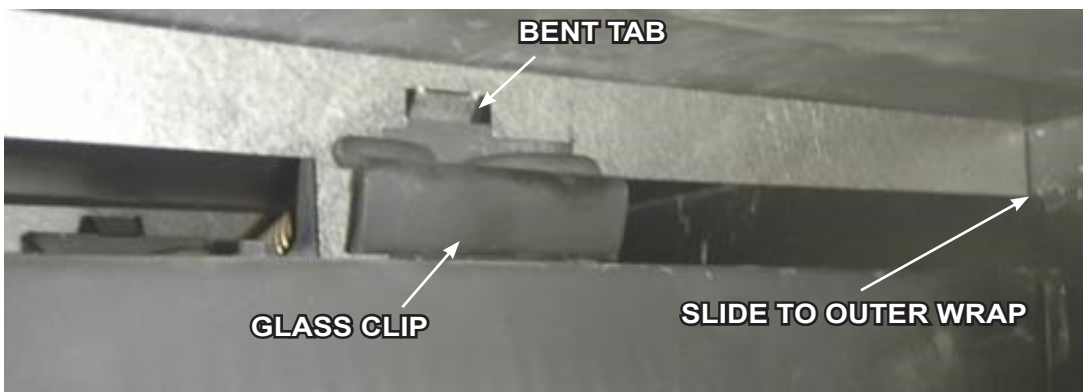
Slide Panel to Outer Wrap (FRONT RIGHT VIEW)
